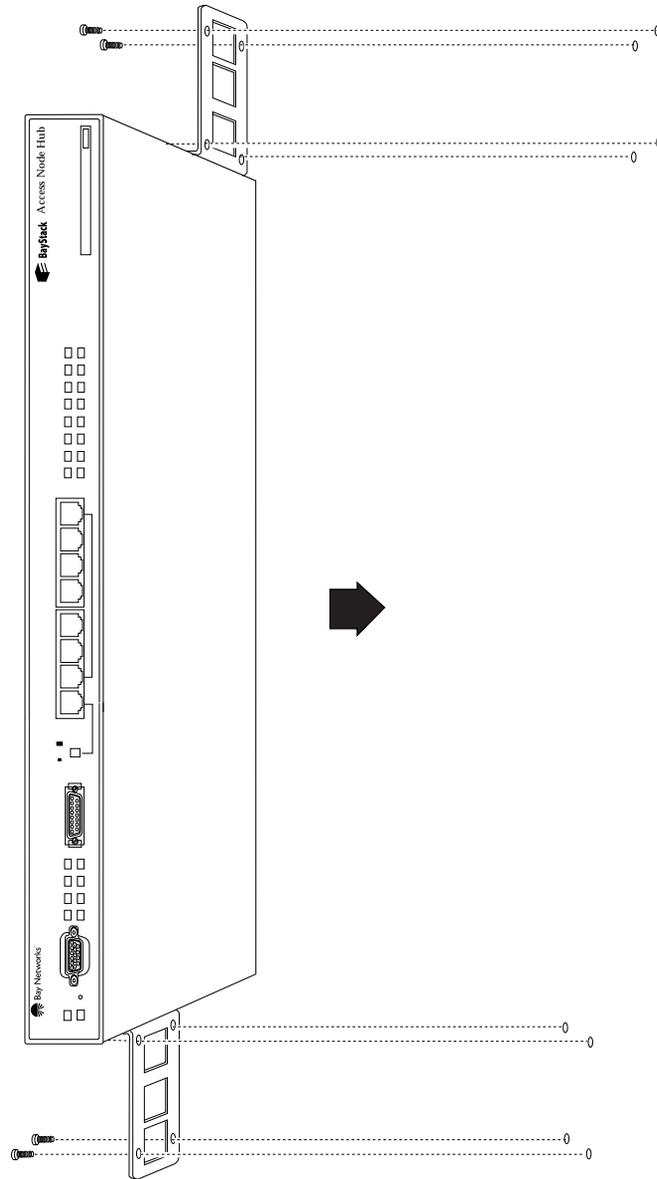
Attaching Flange Brackets to Install the 8-Port ANH on a Wall
